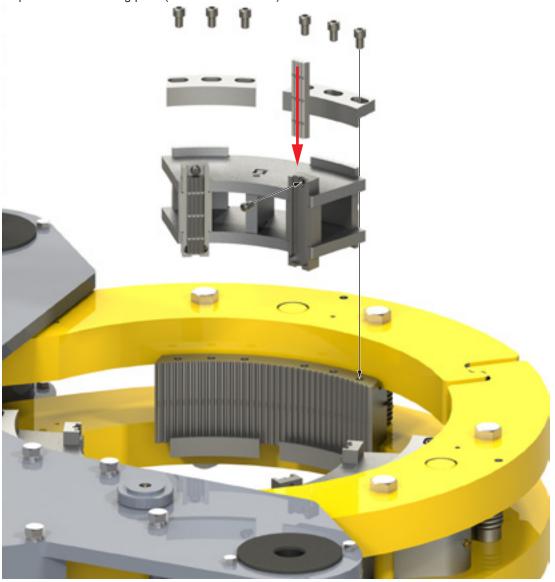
BUCST23000 Lockjaw Backup Jaw / Jaw Die Removal (17" Shown)
